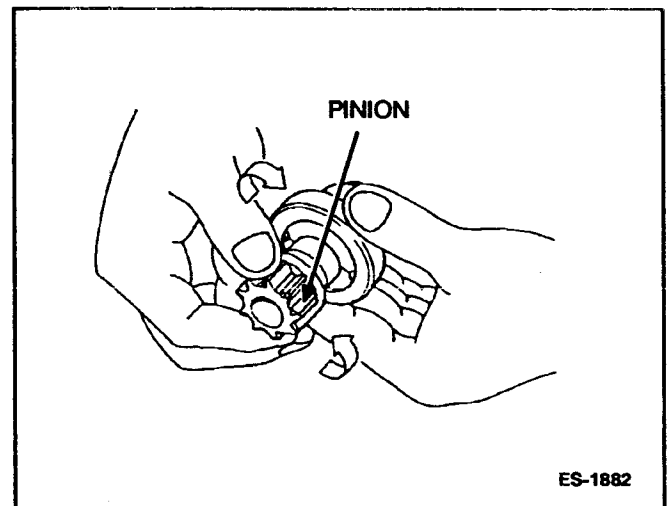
CHECKING PINION FOR PROPER OPERATION
